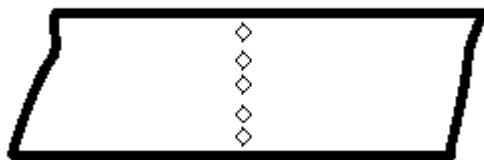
Indentations to initiate crack in fracture toughness test specimen.
